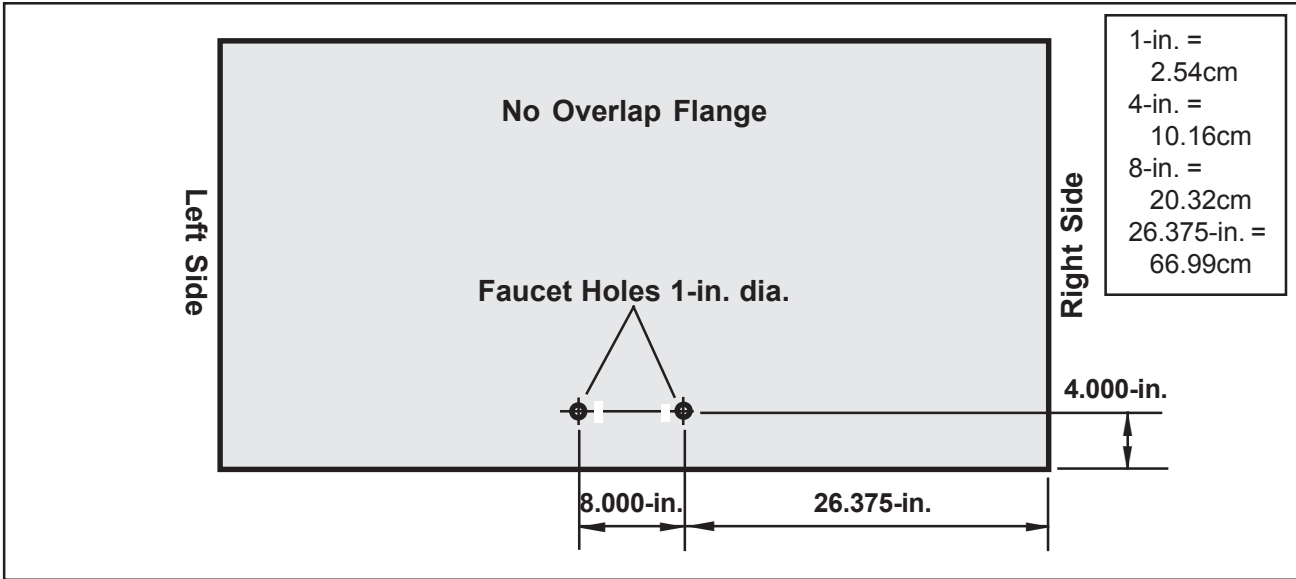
Back Splash Shield, 61-in. Width Tables - Faucet Hole Dimensions
